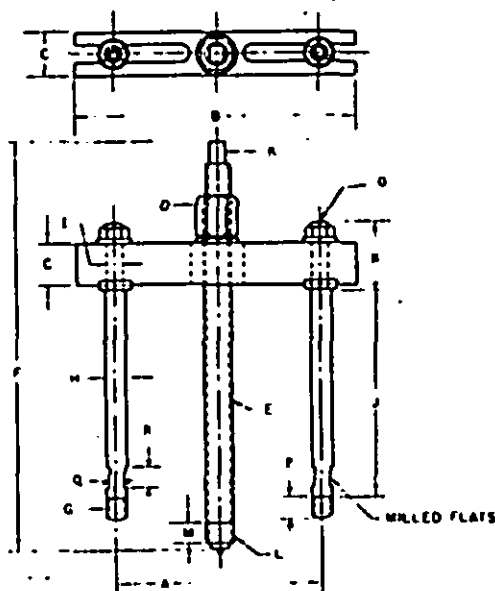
Type VII, puller, mechanical, gear and bearing.
